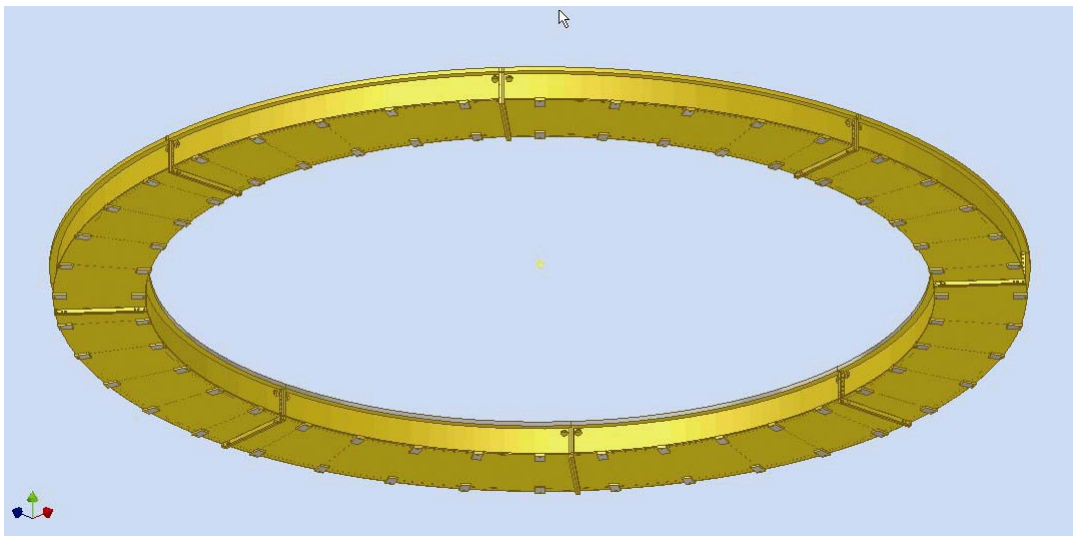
Lower view of azimuth track. Visible are manufacturing joints and machined pads which interface to adjustable anchors to pier.
